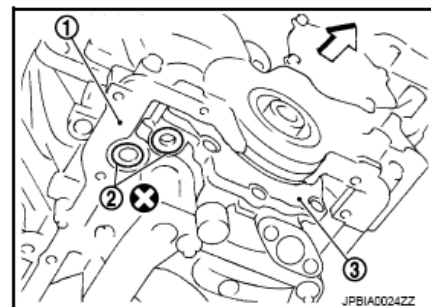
Locating Oil Pump, O-Rings And Lower Cylinder Block
